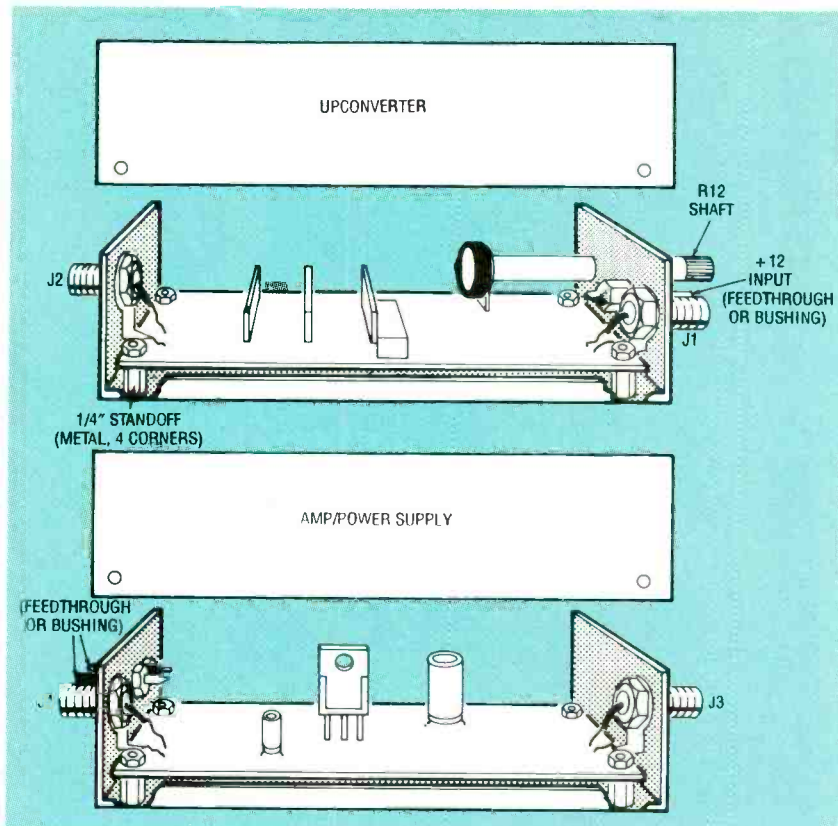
SUGGESTED PACKAGING SCHEMES for the upconverter and amplifier/power supply boards.
